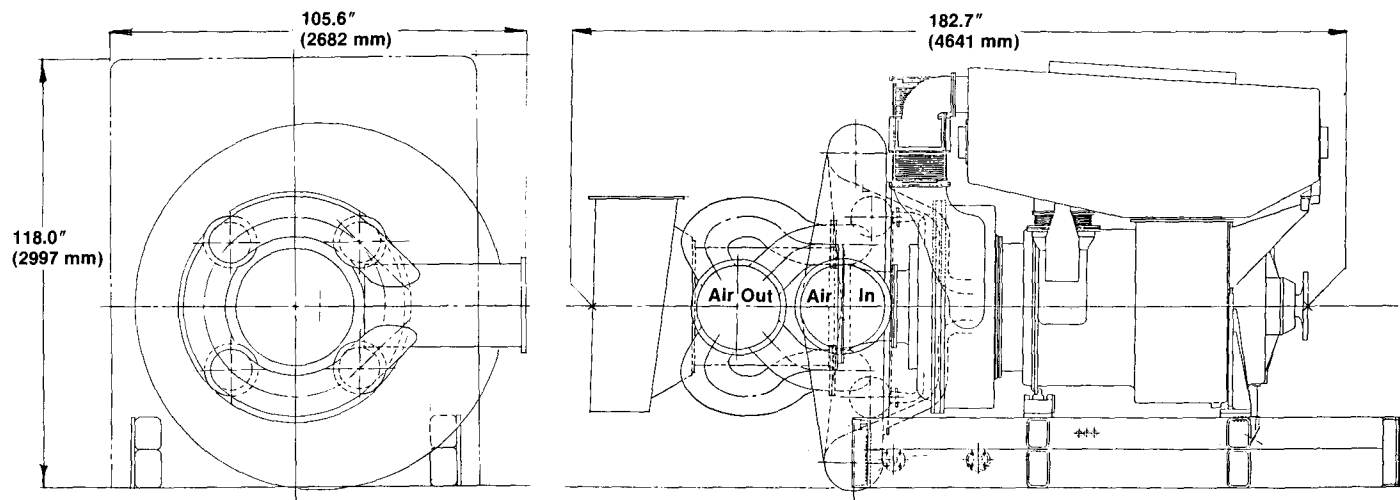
5650 Basic Driver Package Adapted for Off-Skid Intercooler
